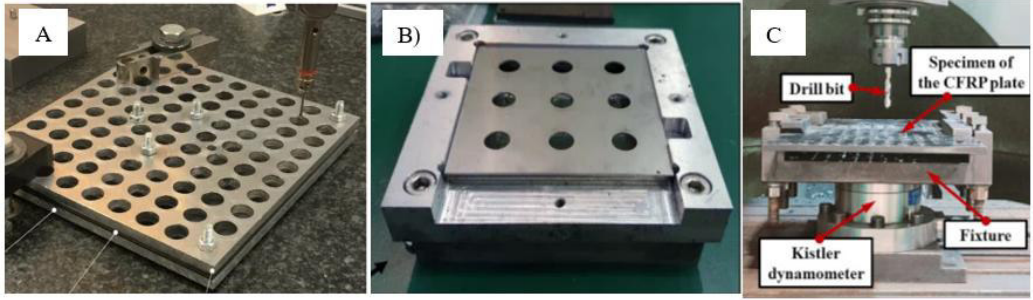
Fixtures applied by researchers: A) support plates below and above the composite workpiece [4], B) back-up support of the composite workpiece [5], C) General fixture [6]
